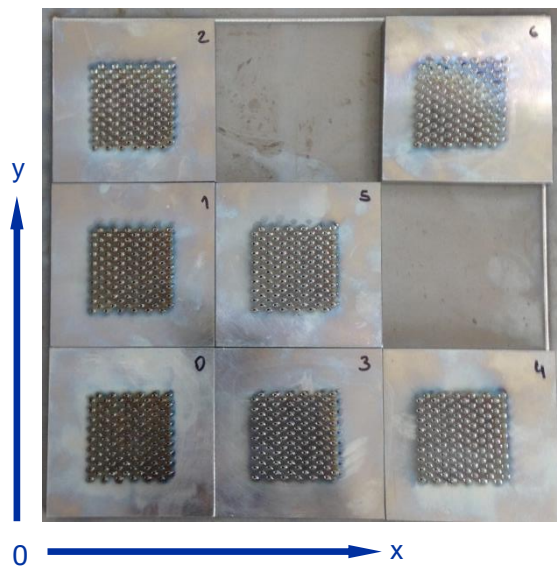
Layout of seven samples (0 – 6) on a larger 210 mm² plate.
